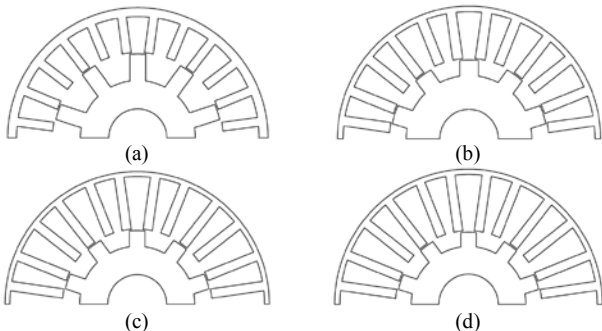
Optimized 12/10 stator-/rotor-pole WFSF machines. (a) Original machine. (b) Machine without EWs. (c) Machine A. (d) Machine B.
